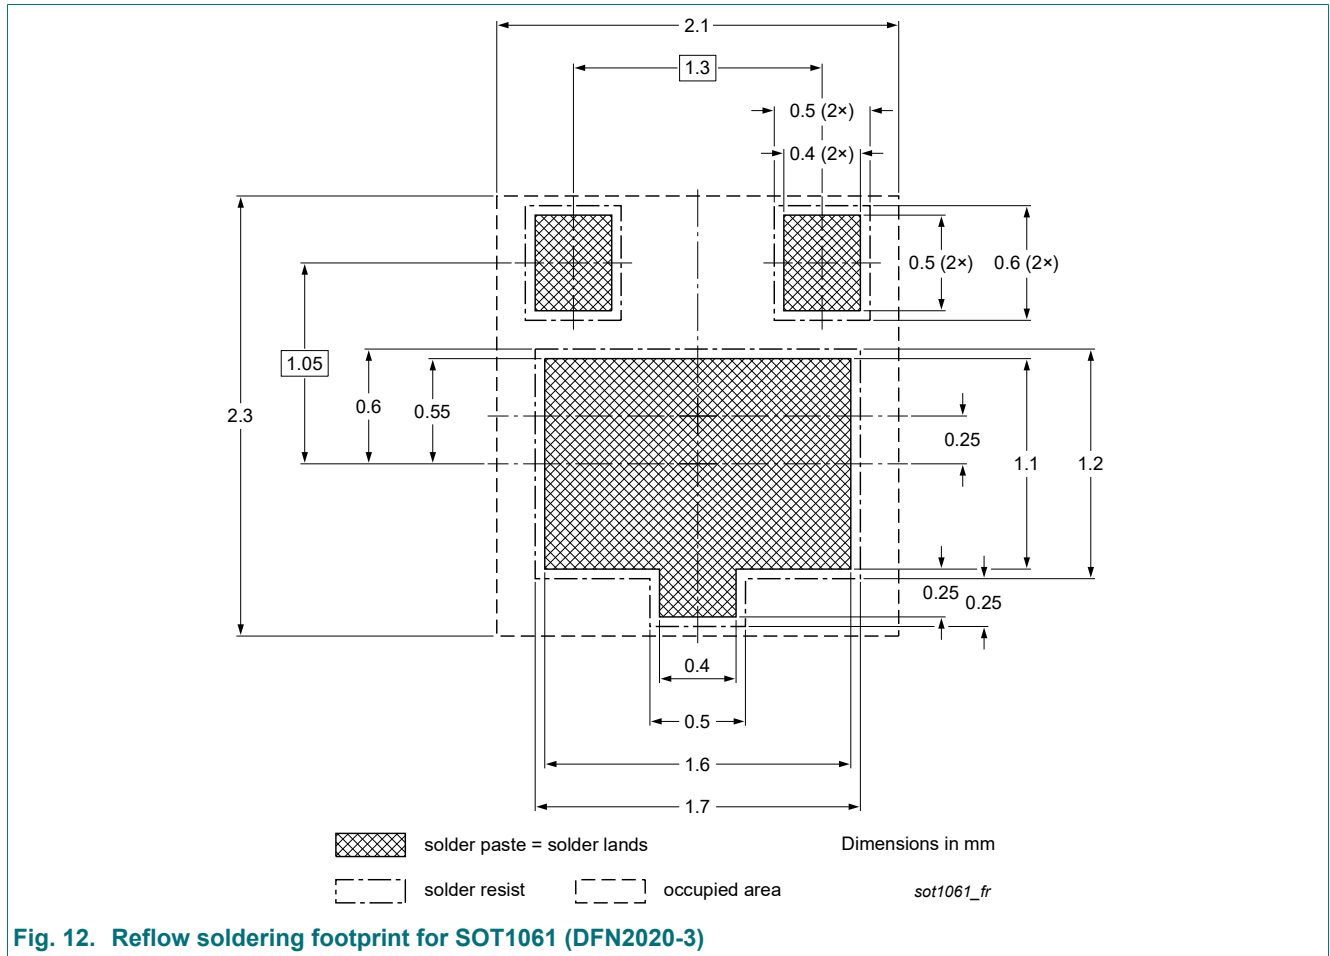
Reflow soldering footprint for SOT1061 (DFN2020-3)
